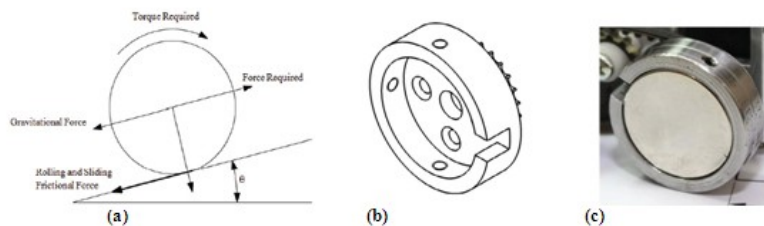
(a) Free-body diagram of acting on the wheel, (b) Designed of an empty wheel rim, (c) Completed prototype of wheel rim with magnet disc slotted in [5].
